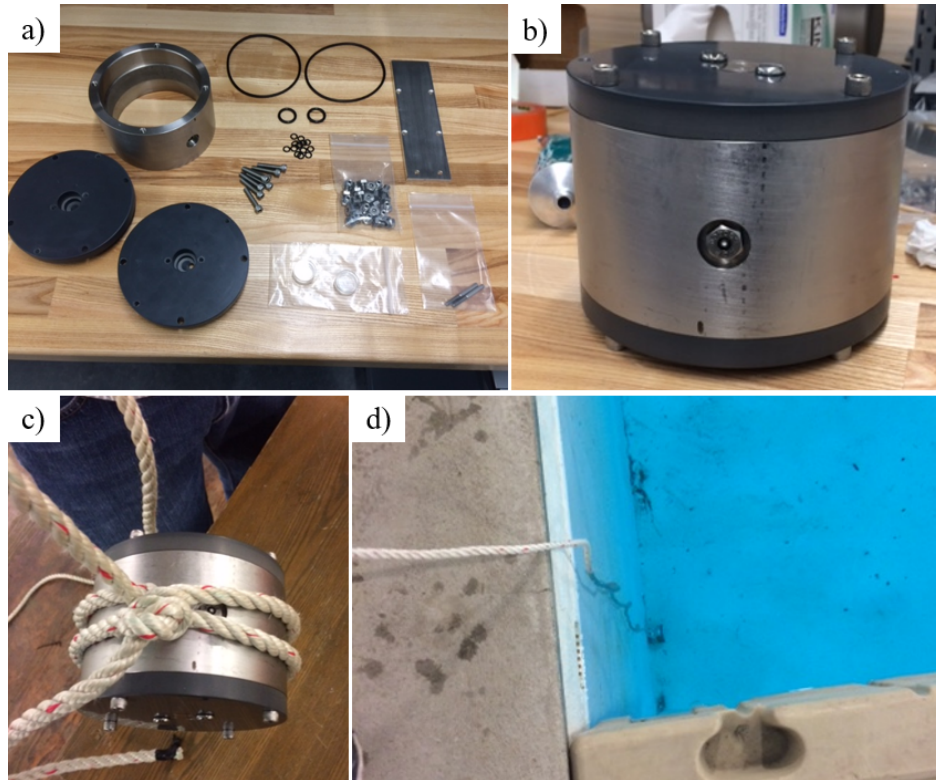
Test cylinder used to verify o-ring seals: a) disassembled test cylinder, b) assembled test cylinder, c) test cylinder tied to deployment rope, and d) test cylinder at the bottom of the UNH Engineering Tank.
